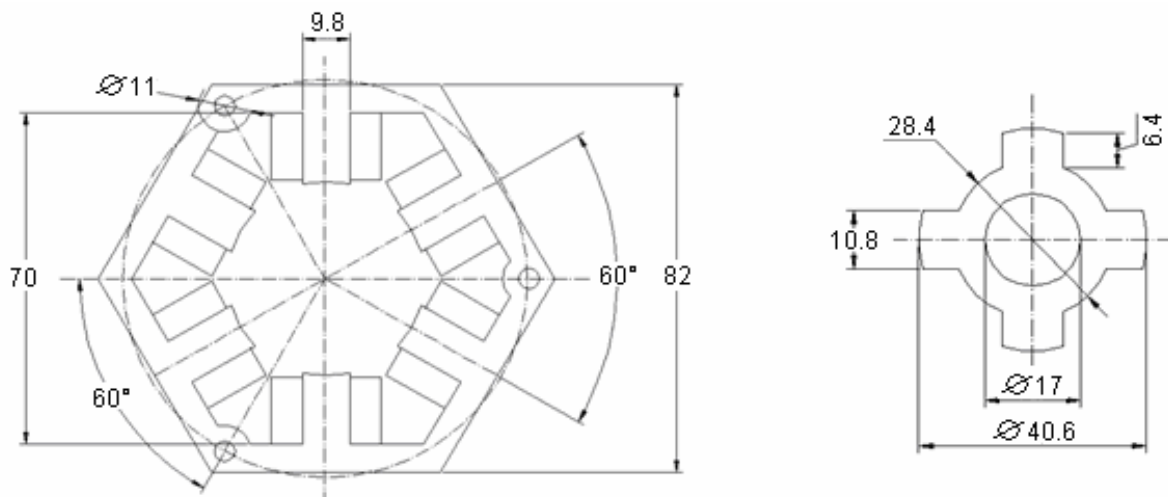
Stator and rotor geometry dimensions of the original 6/4- SRM I
